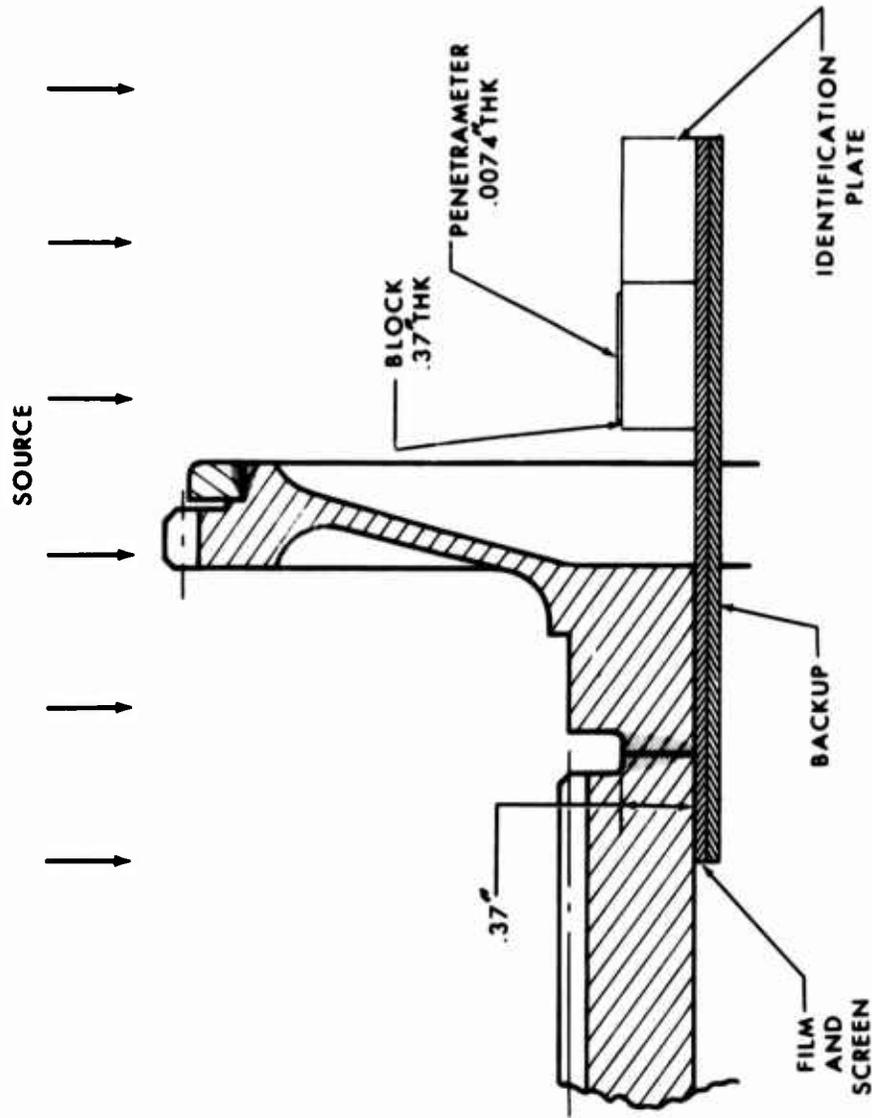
Setup for X-Ray Inspection of First-Row Pinion Butt Welds.
